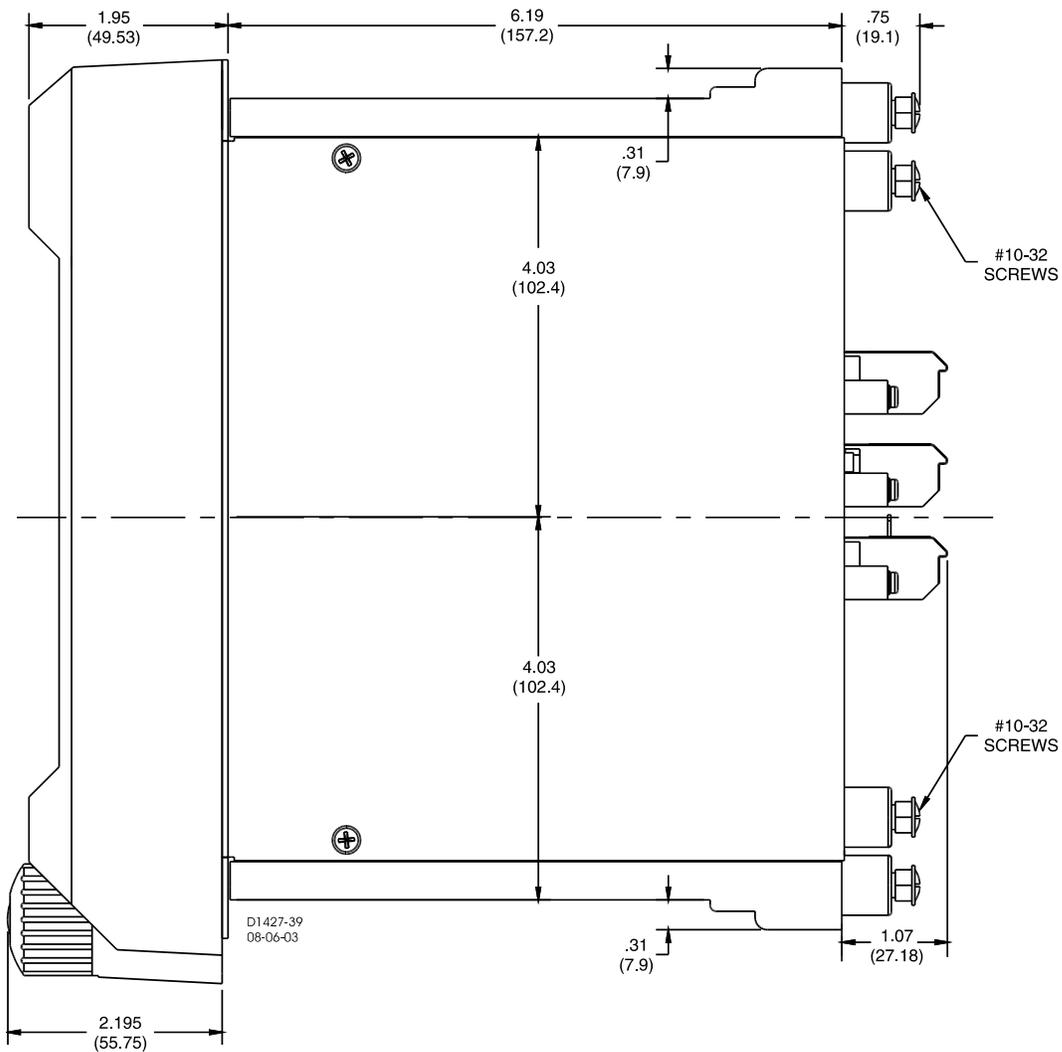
S1 Case, Double-Ended, Semi-Flush Mounting, Outline Dimensions, Side View
